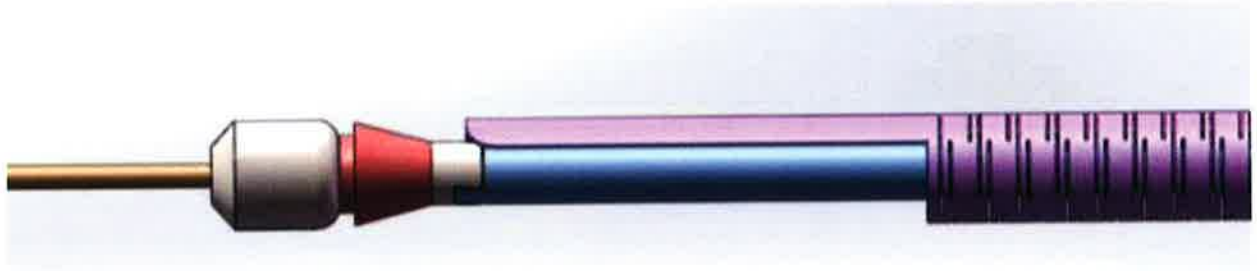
Shown above is the conical bearing and flexible follower sleeve design for the second round of testing. The flexibility slots can be seen in the right hand side of the assembly (shown in purple).
